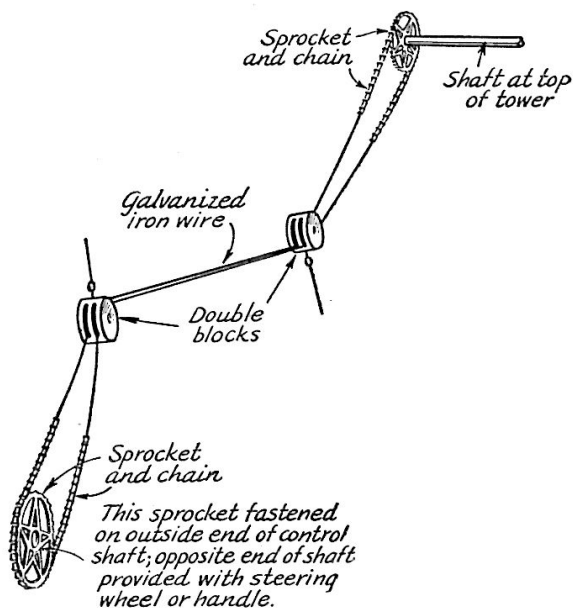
Hookup of the remote control system used with the drive mechanism shown in Fig. 1719.
